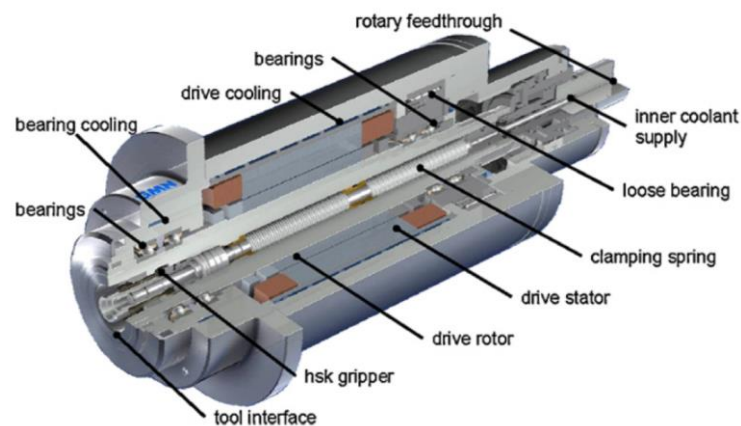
Sectional view of a motor spindle (Abele et al., 2010)
